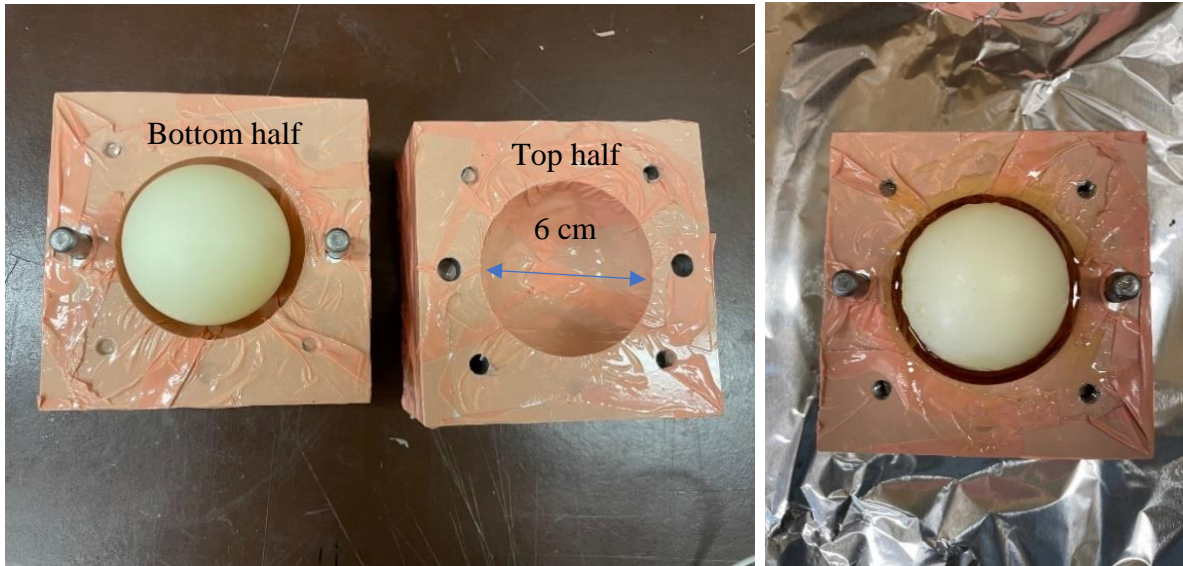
a) Release film is applied to the mold's spherical surface; b) PF resin injected in bottom half of sphere mold.
